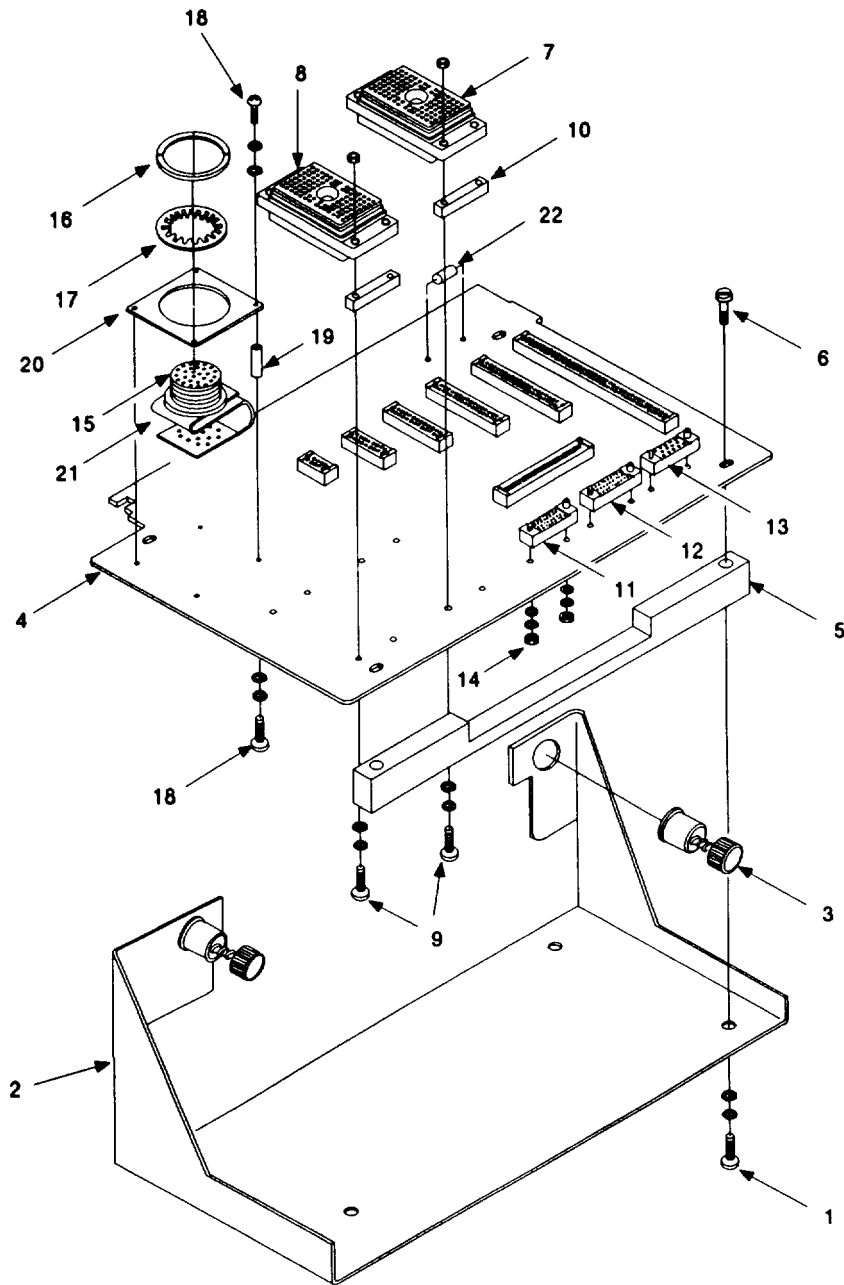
Test Adapter A13 Connector Layout for Testing
